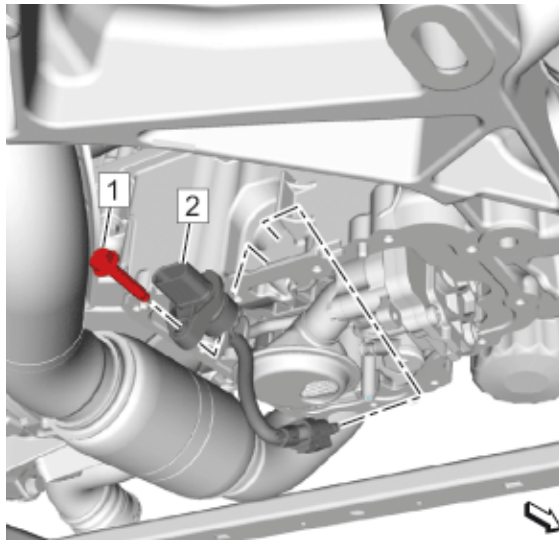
Engine Oil Level Indicator Control Module, Wiring Harness And Bolt
